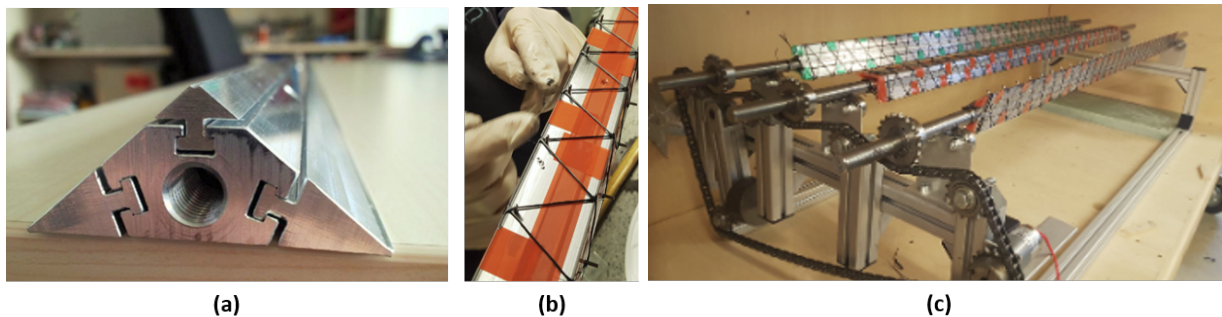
(a) Hub for winding fiber on carbon tubes – core with side pieces, (b) CF winding on hub (c) Rotation device for winding the cores.
